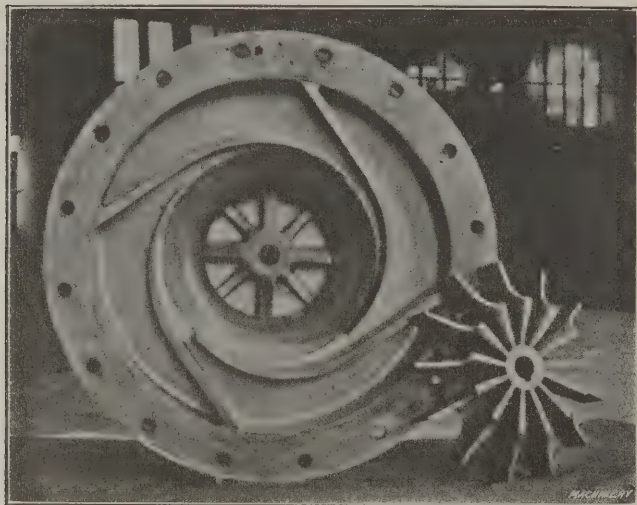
Impeller and Guide-passages of Mather-Reynolds Pump
